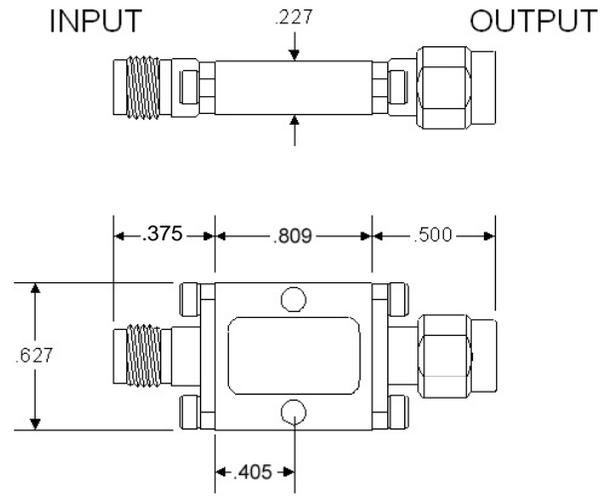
Coaxial package mechanical dimensions. Input and output are labeled on the coaxial package.
